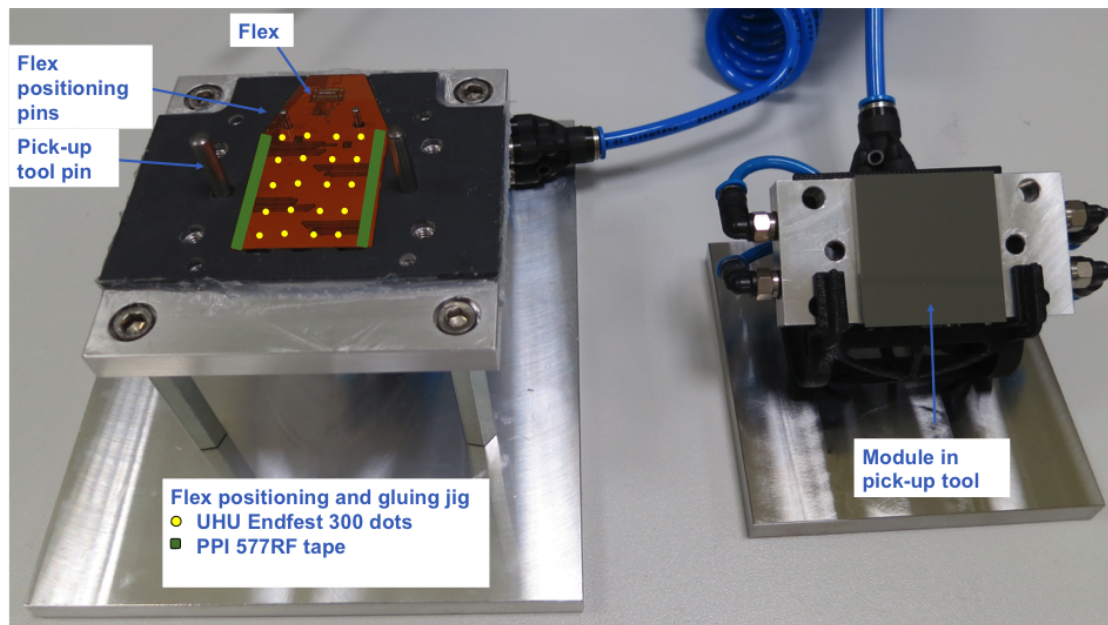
Photo of a module flex in flex positioning and module gluing jig (left). Areas of glue application are indicated. Module in pick-up tool for assembly on flex (right).
